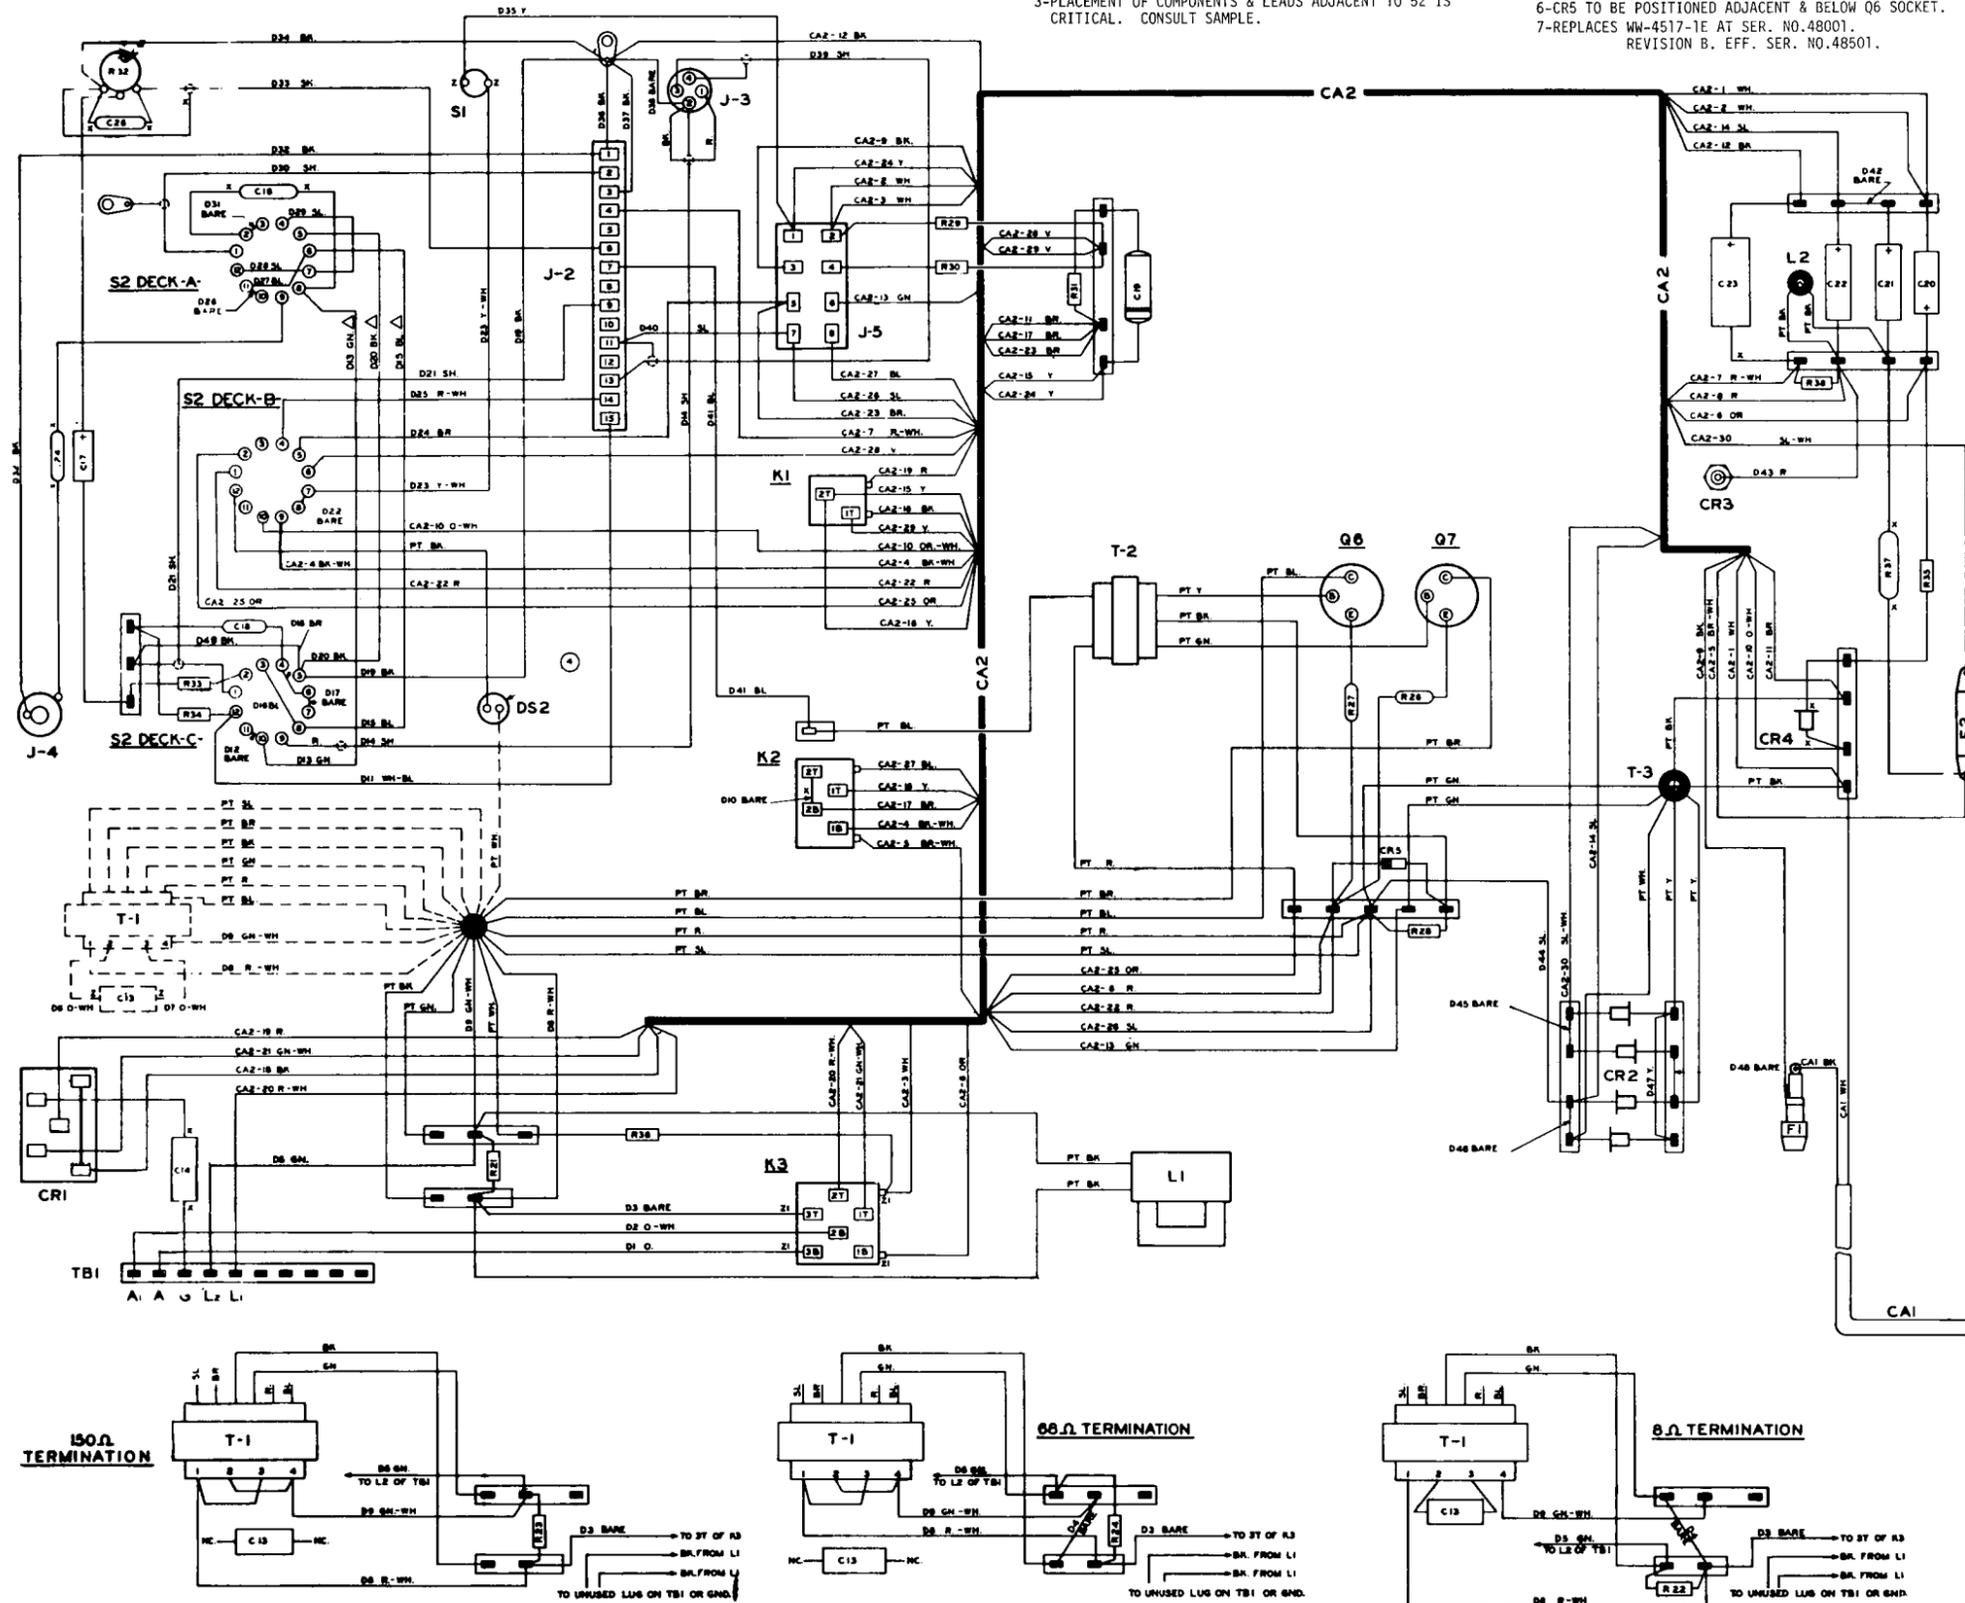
Circuit board assembly, WW-5152-1D (part of final assembly, figure 1).
